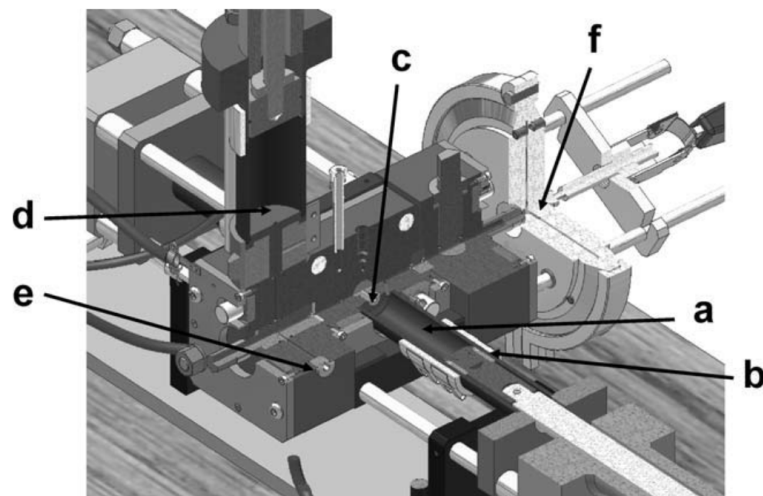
Three-dimensional view of the mixer : (a) chamber, (b) piston with seal, (c) mixing element, (d) feeding unit for melts, (e) feeding channel for liquids, and (f) mold.
